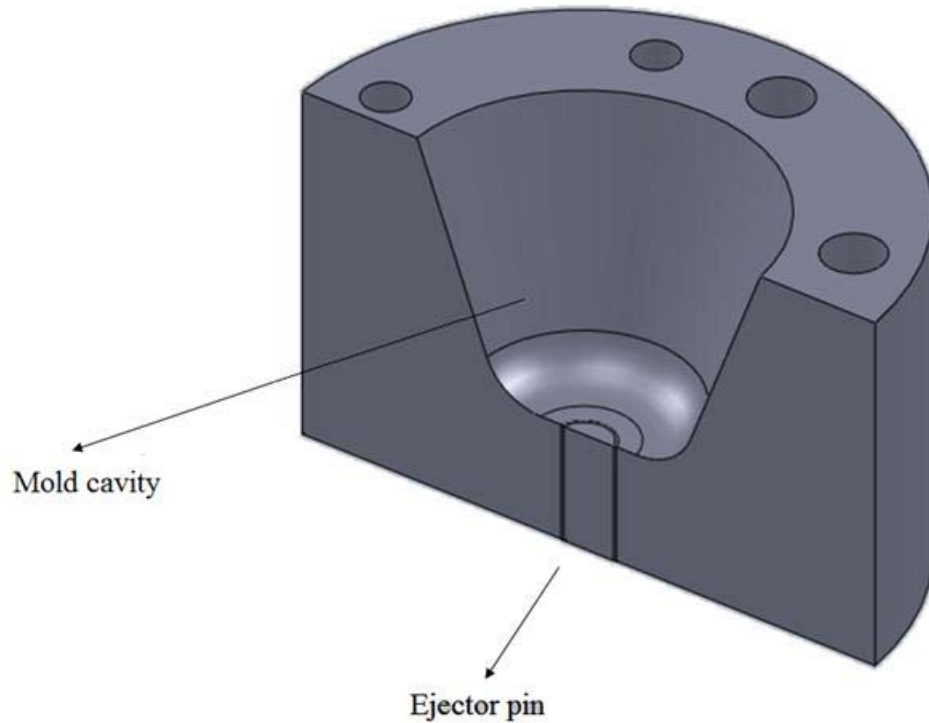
Section view of the bottom plate- ejector pin assembly
